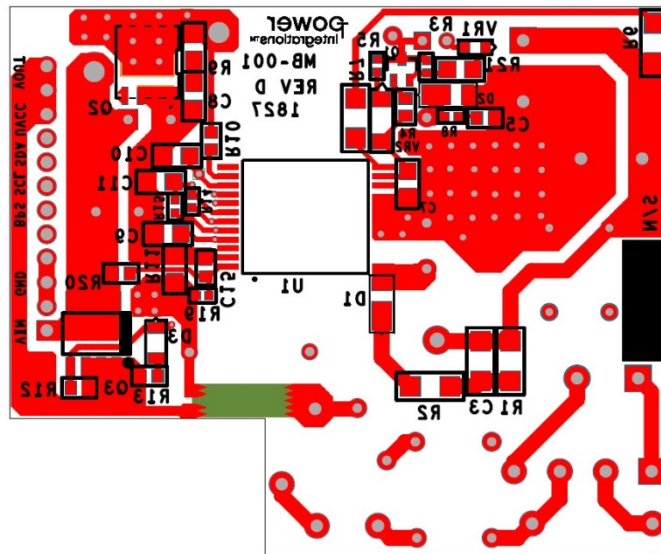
Printed Circuit Layout, Mother Board, Bottom.
